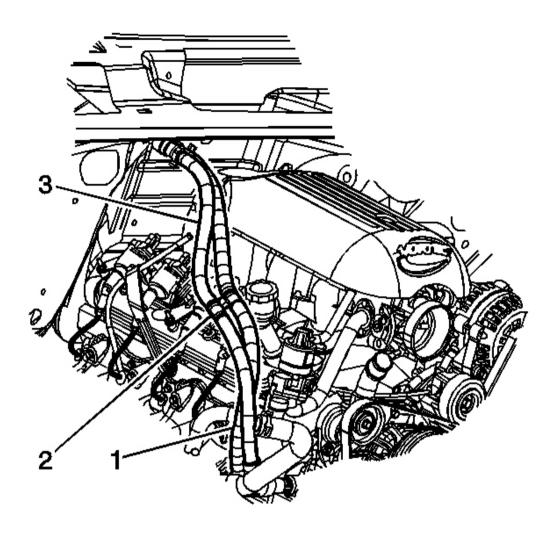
Heater Inlet Hose & Mounting Clip Courtesy of GENERAL MOTORS CORP.
